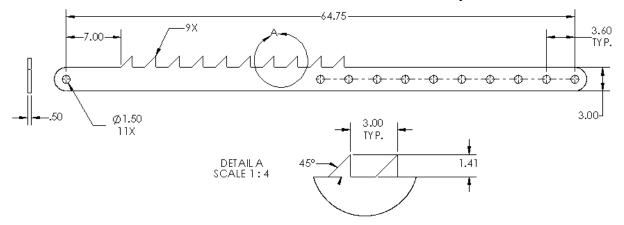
Figure D: Scissor Arm Dimensions. The leftmost hole fits into the base while the rightmost hole attaches to the table surface fixtures. The teeth used in conjunction with the lockout mechanism are described by Detail A. Note that the features defined in this drawing are not exhaustive, but rather highlight the more critical dimensions for reference.
